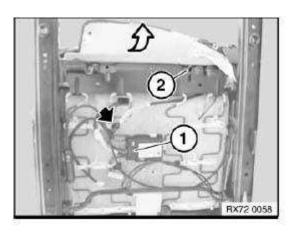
Identifying Plug Connection And Cable Holder Courtesy of BMW OF NORTH AMERICA, INC.
